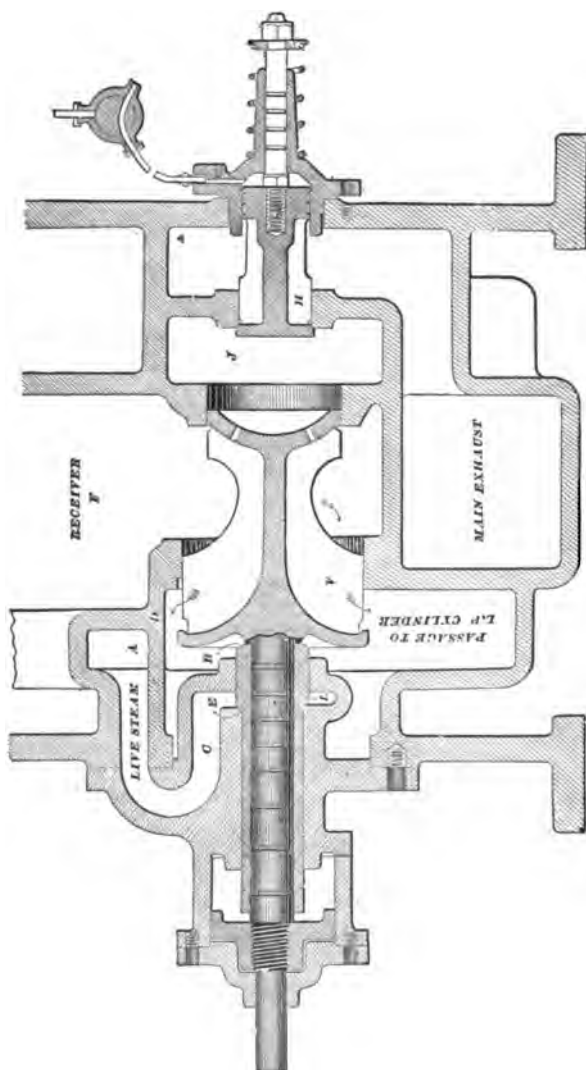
RICHMOND LOCOMOTIVE AND MACHINE WORKS COMPANY.
